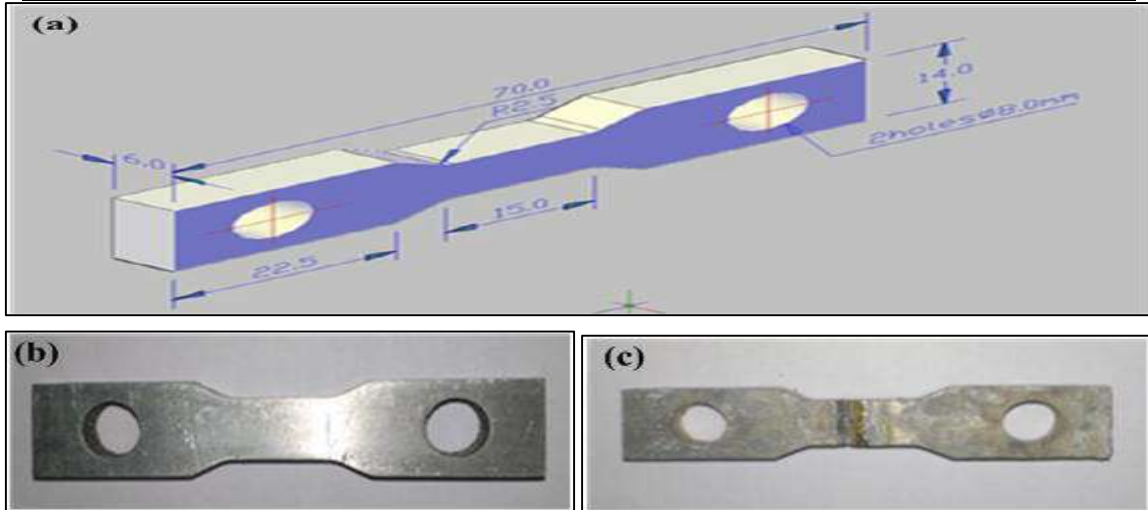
SCC test specimens (a) virtual image, (b) base, and (c) welded
